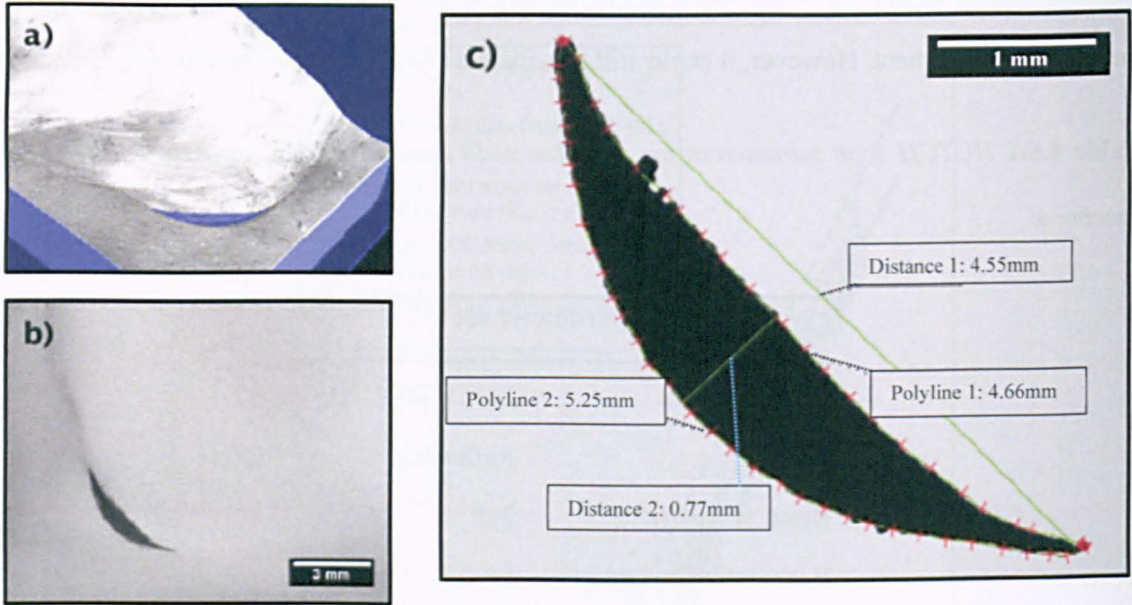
Weld toe undercut observed at weld return location, a) defect viewed in 3D model, b) μ -CT slice of defect in x-y plane, c) defect dimensions in x-y plane.
